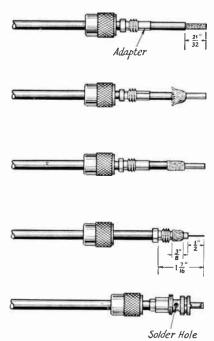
Method of assembling ½-inch cable, Amphenol Type 83-1SP plug and adapter.
